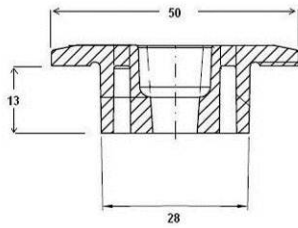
cross section of a mounting clamp to be used for attaching the modules to support structure.
